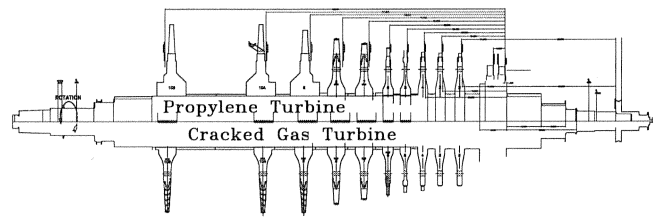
Composite Drawing of Both Steam Turbine Rotors.
